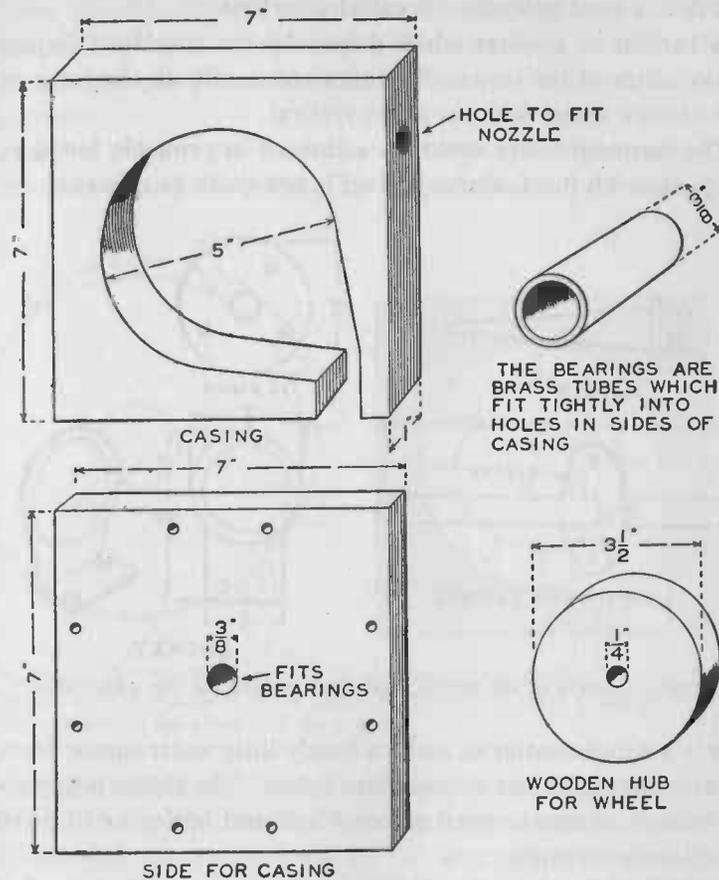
These parts for the water motor are easy to make. The casing and the sides for the casing are made of wood.
